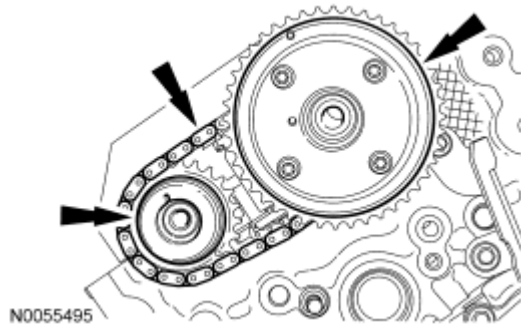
Positioning RH Secondary Timing Assembly Onto Camshafts
